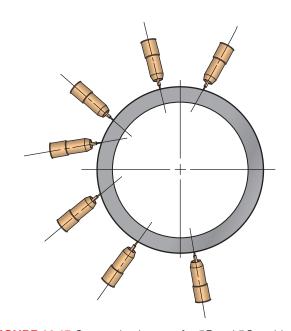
Gun angle changes for 5F and 5G welds.
